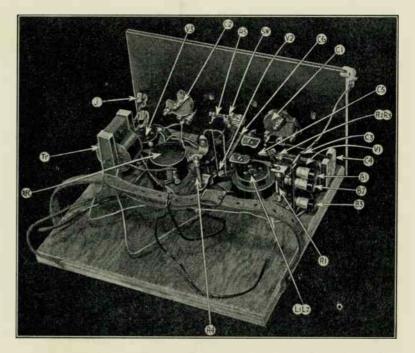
Fig. B. Rear view of the "Craft Box." All the parts, few in number, are easily seen. What parts would YOU use?
